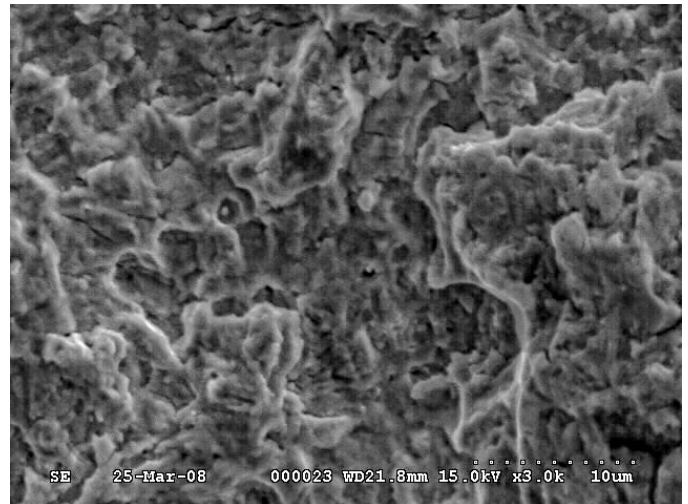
3000X Fracture Surface Bolt 2
